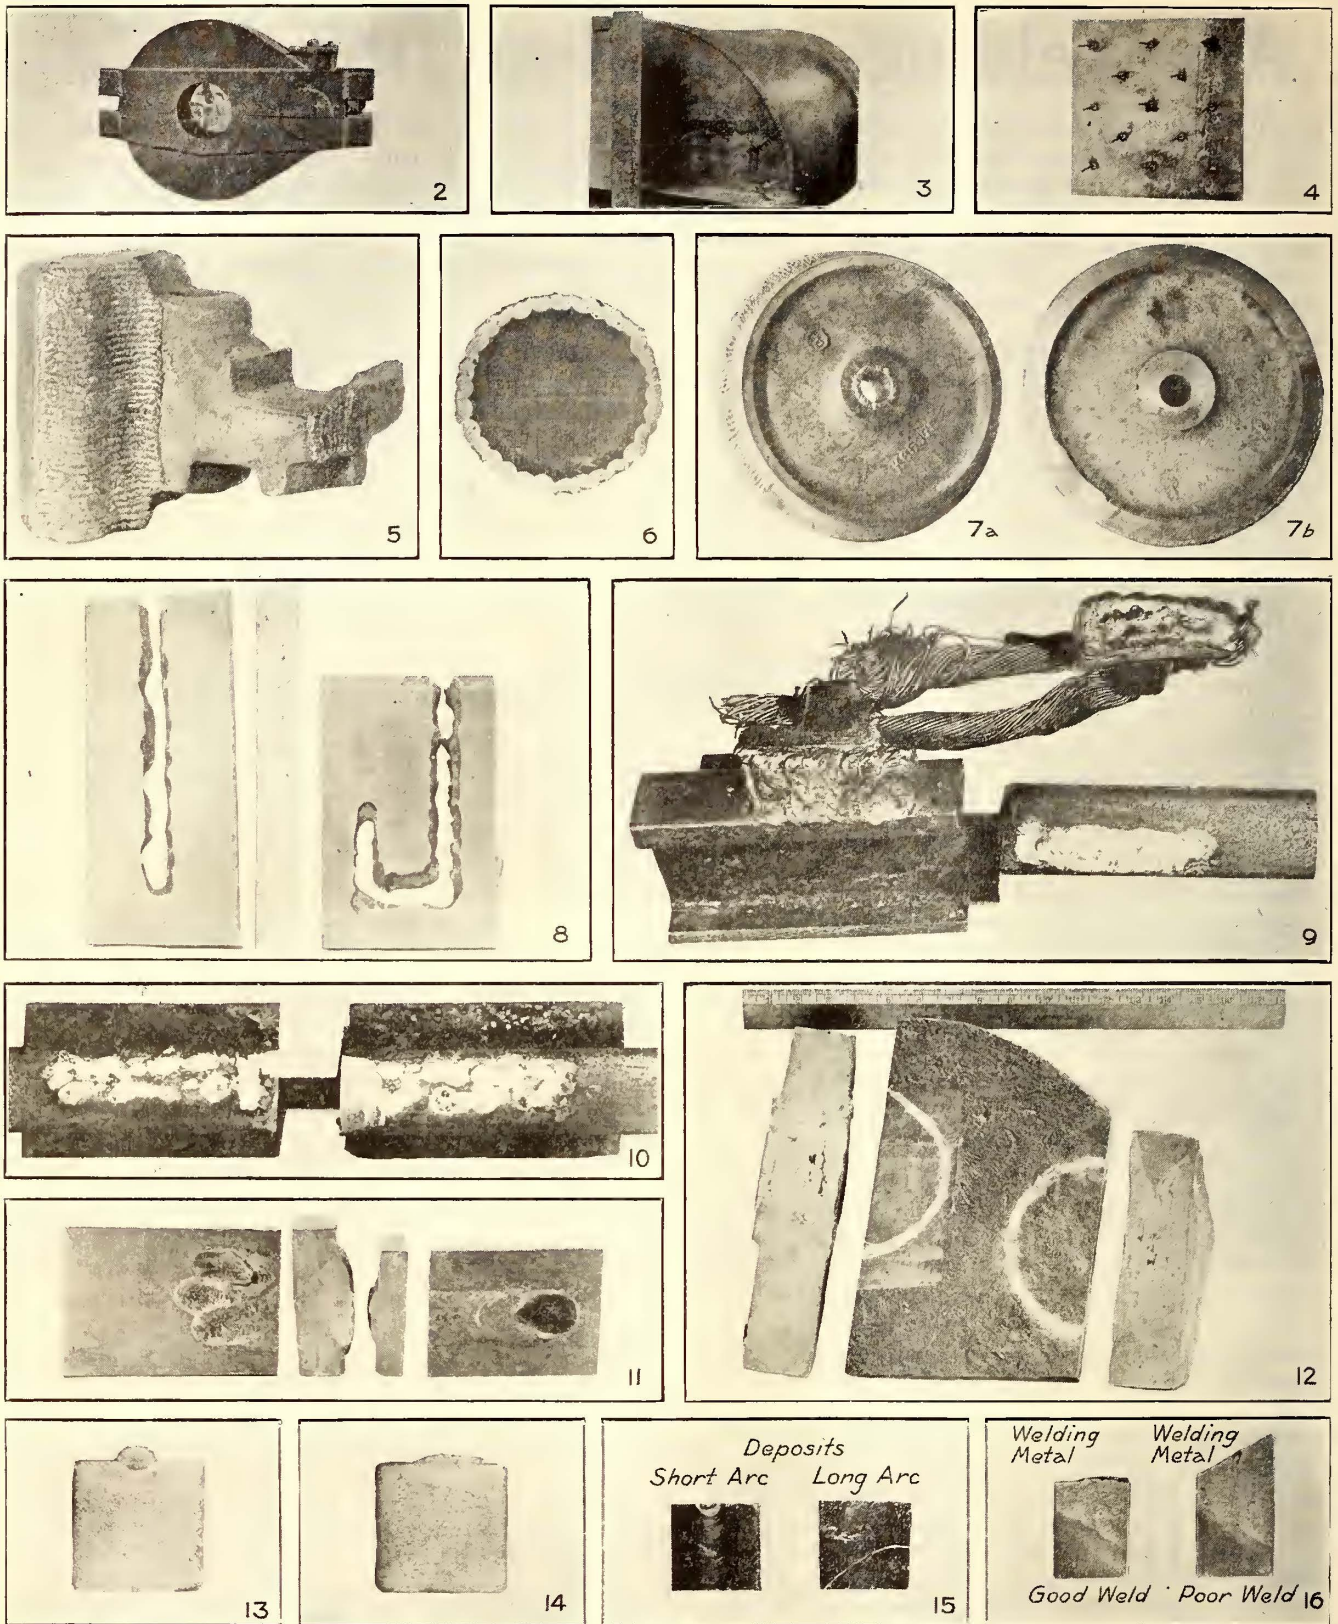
Method of welding gear cases used by Sydney, Australia, electric railways.
